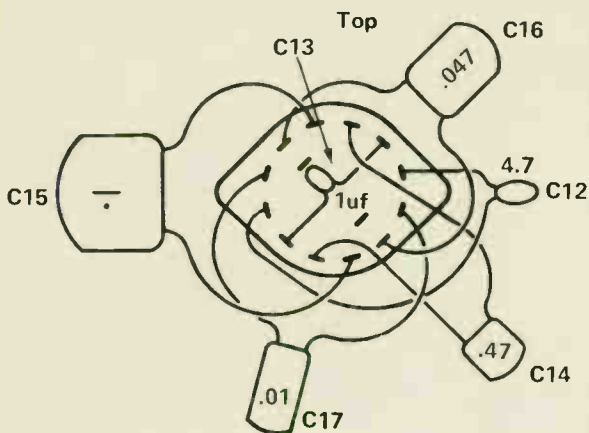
illustrates the mounting of capacitors to switch 1. Assemble and solder these capacitors to the switch as shown.
